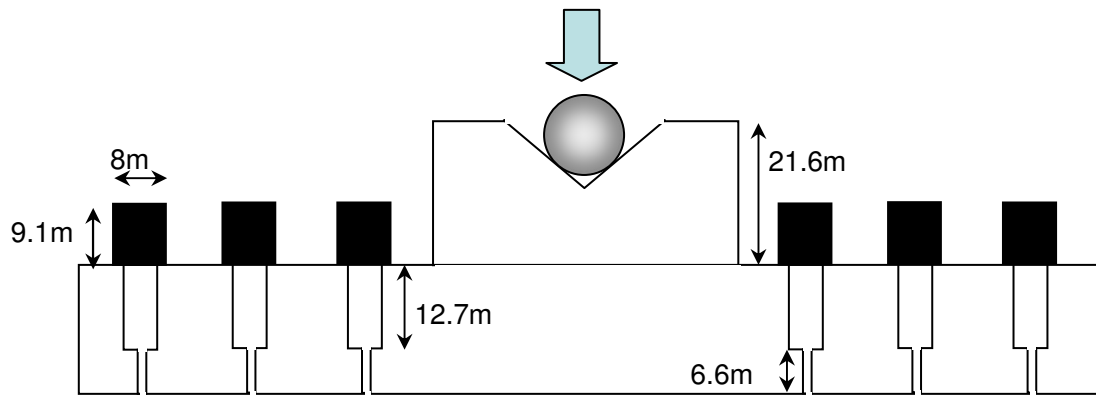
Schematic Cross-Sectional View of the Stainless Steel Fixture
